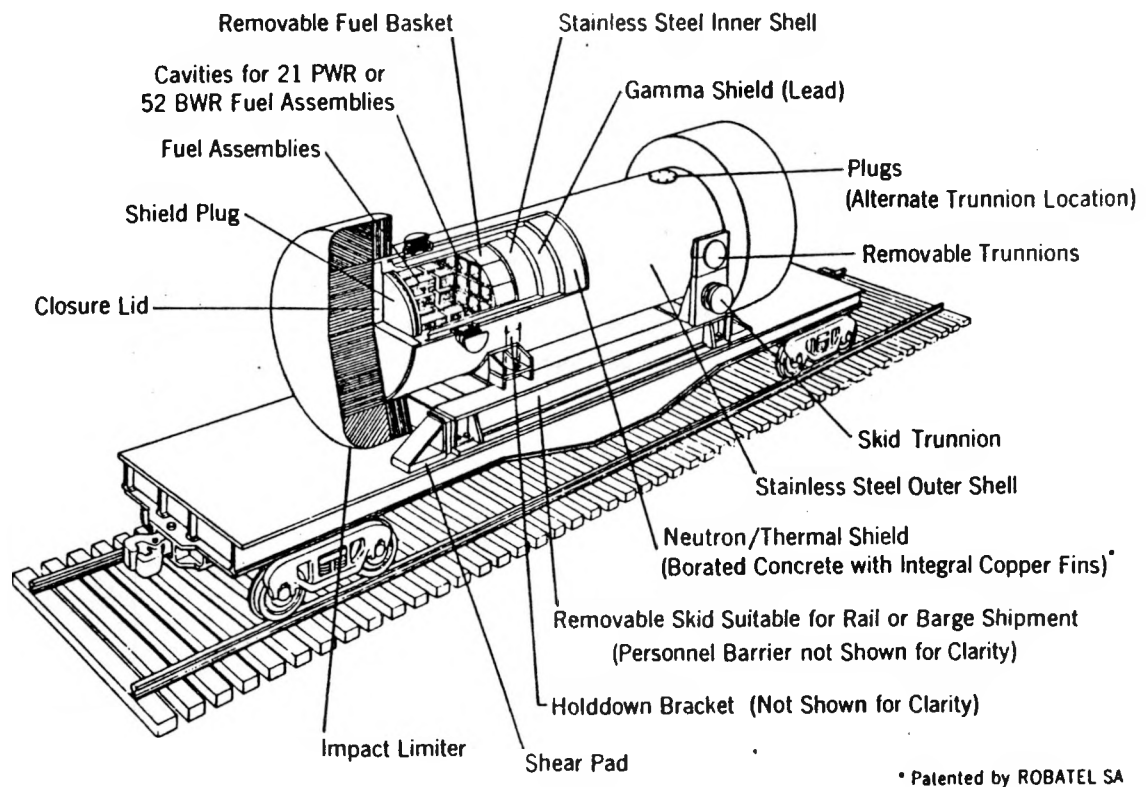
Babcock & Wilcox BR-100 100 Ton Rail/Barge Cask, mounted on Rail Car
